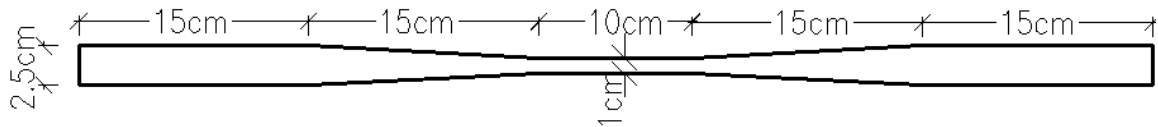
Shape and Dimension of a Modified Type of Wedge Test Piece
